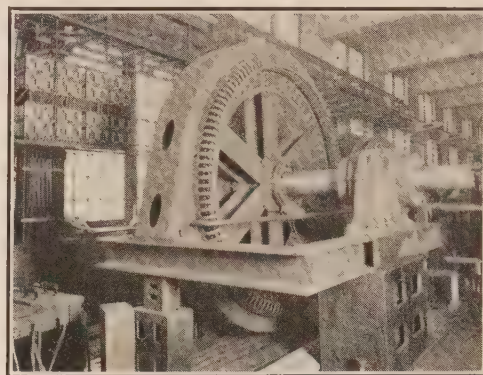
ARC WELDED A-C. GENERATOR
